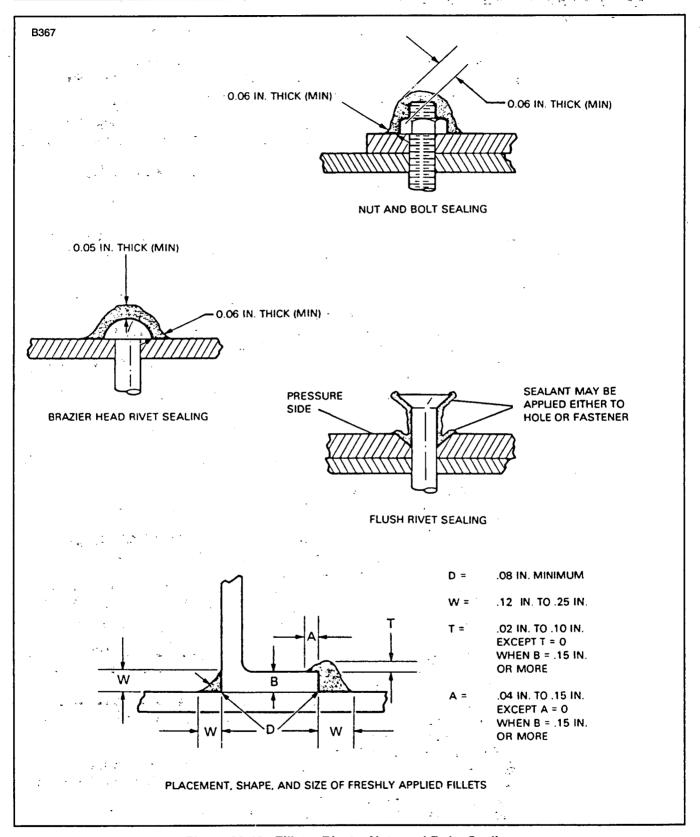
Fillets, Rivets, Nuts and Bolts Sealing
